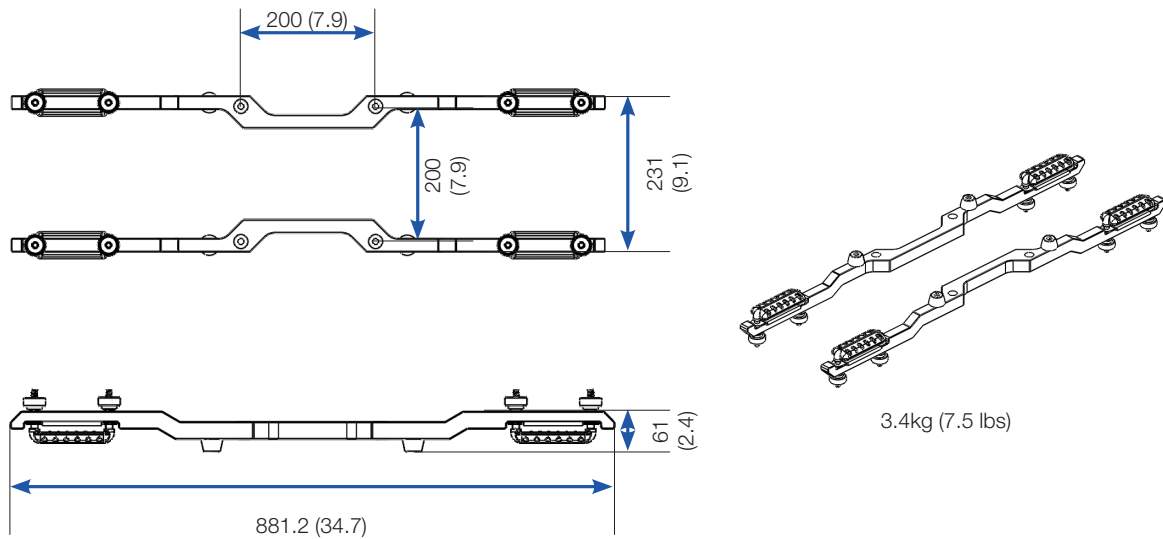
Land Mobile Mount Adapter Dimension (OW-6018)
